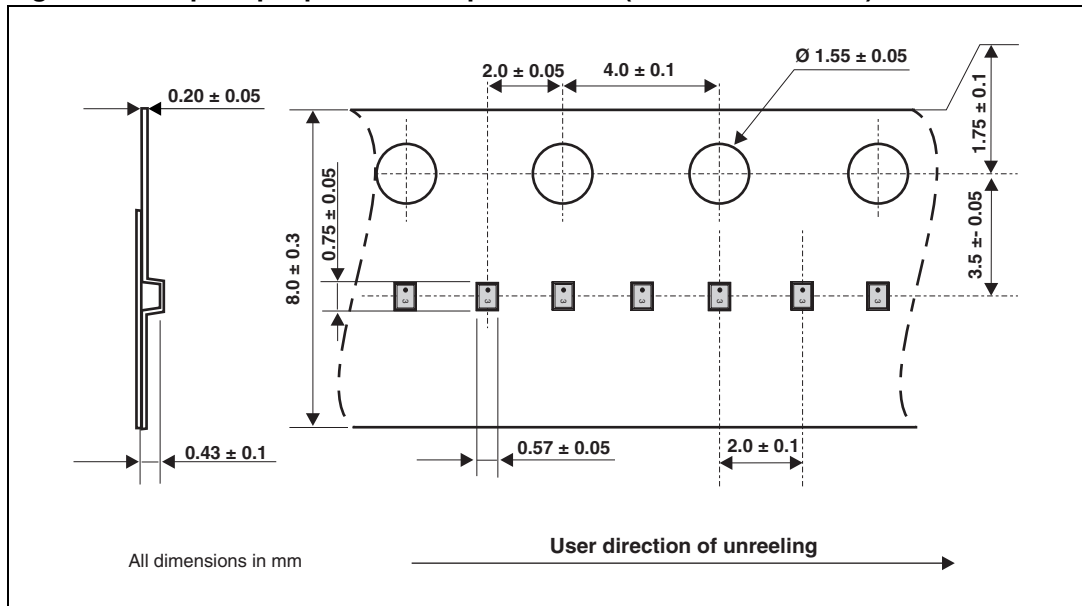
Flip Chip tape and reel specification (dimensions in mm)
